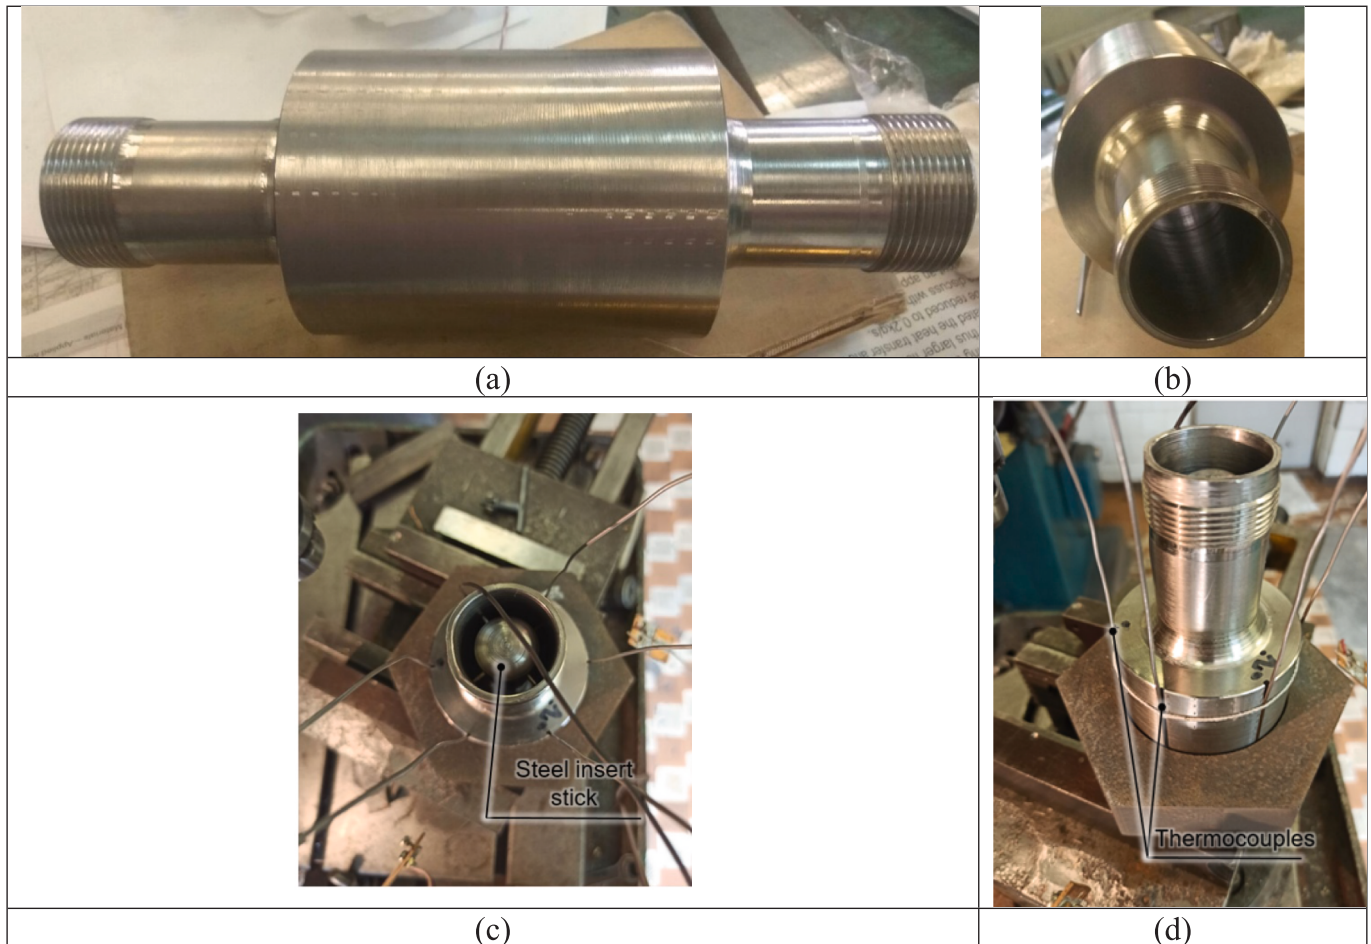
Stainless steel pressure tube: (a) front view, (b) side view showing a 35 mm diameter hole, (c) side view showing an inserted steel stick, (e) pre-assembly with installation of thermocouples.
